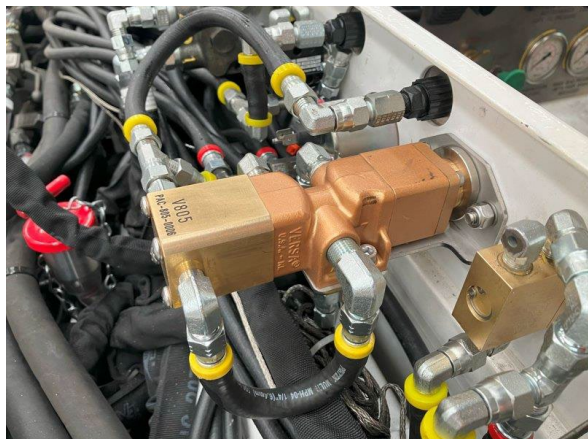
Park Brake Valve installation viewed from the pilot entry side, also showing mount bracket.
